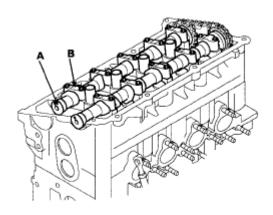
Identifying Timing Chain Installation Positions Courtesy of HYUNDAI MOTOR CO.
